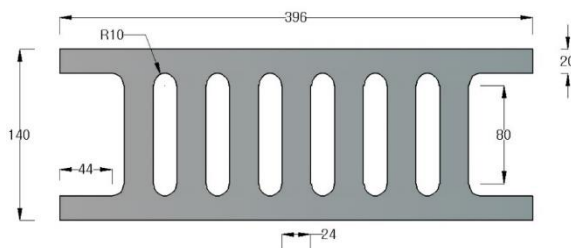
Geometric dimensions of the investigated shape memory-yielding metal damper specimen [18]
